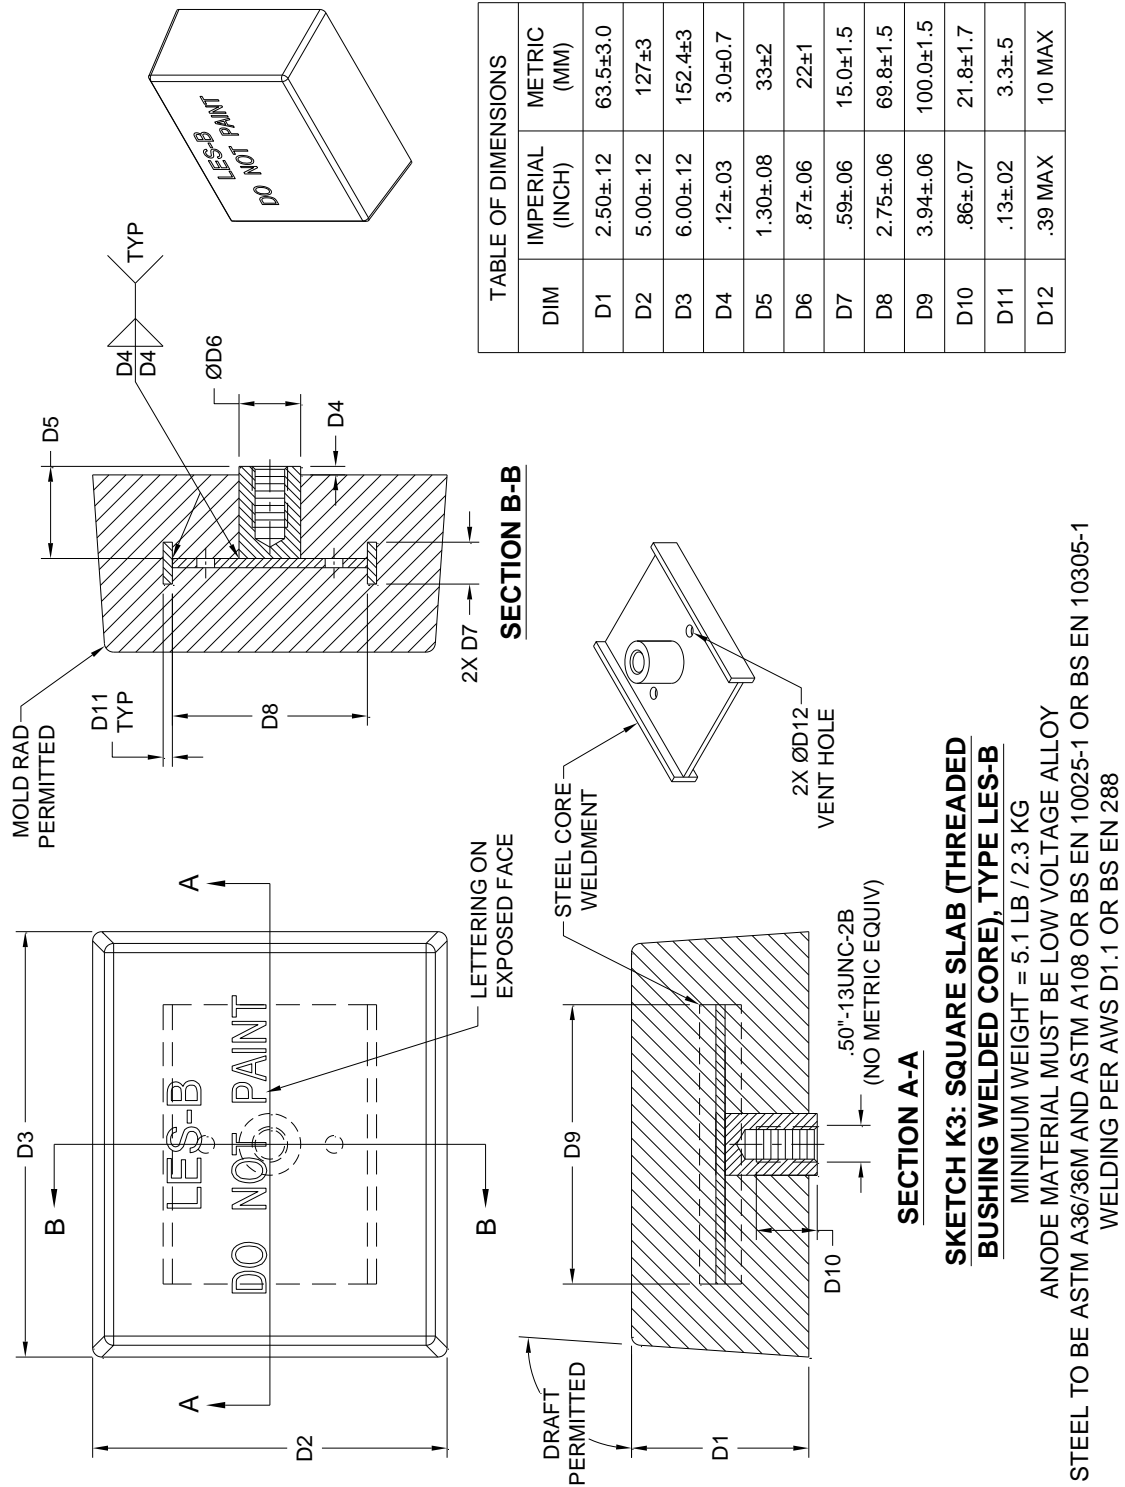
Aluminum, square slab (threaded bushing welded core) type LES-B.
